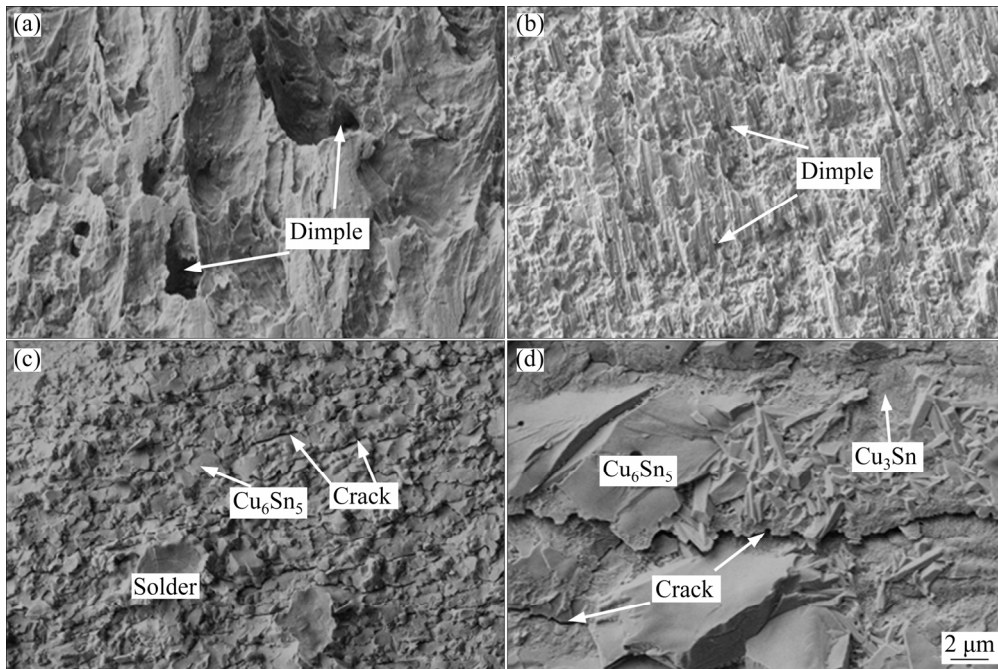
Fracture surface morphology of SAC305 solder joints at different temperatures: (a) 298 K; (b) 223 K; (c) 173 K; (d) 123 K
